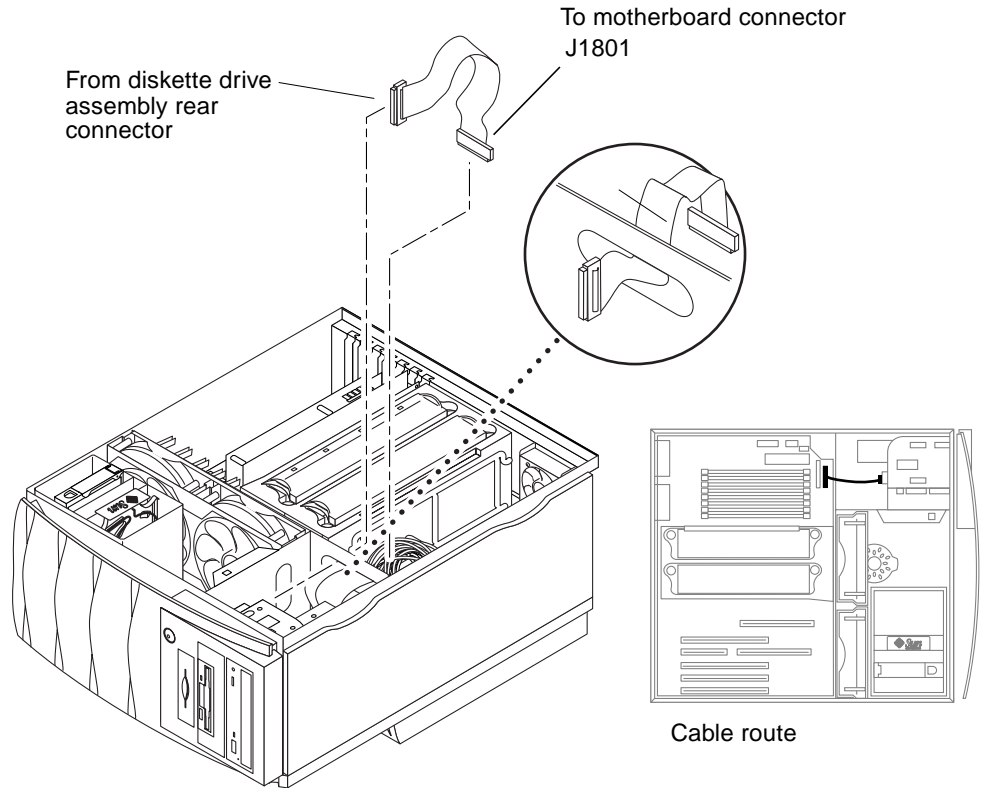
Removing and Replacing the Diskette Drive Cable Assembly
